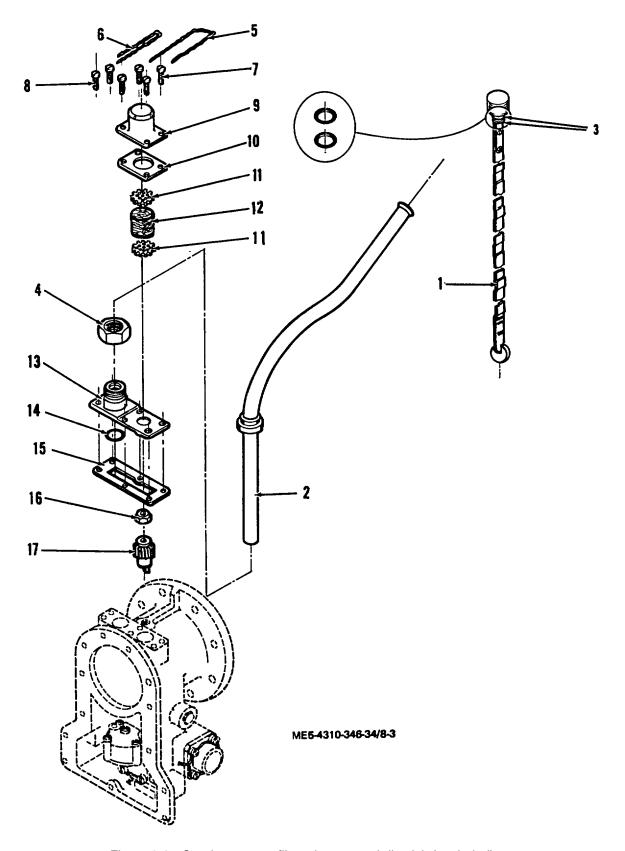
Crankcase vent filter element and dipstick (exploded).
